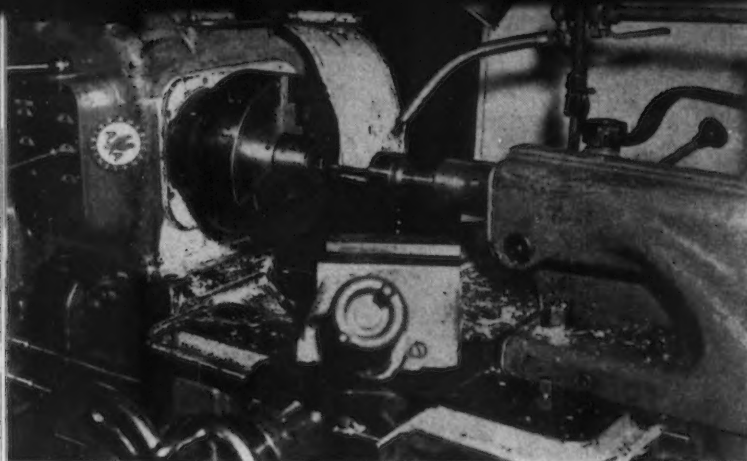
Setup for drilling a square hole with a lathe. The full floating chuck with triangular drill is shown at right. The work is within the holder, behind the guide plate.
